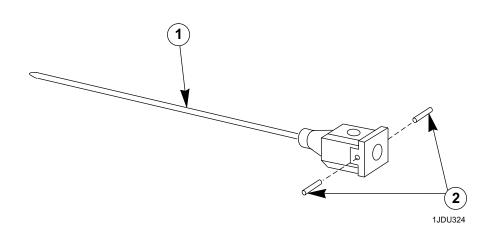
C. RETURN ROD AND TRANSFER MECHANISM ASSEMBLY
